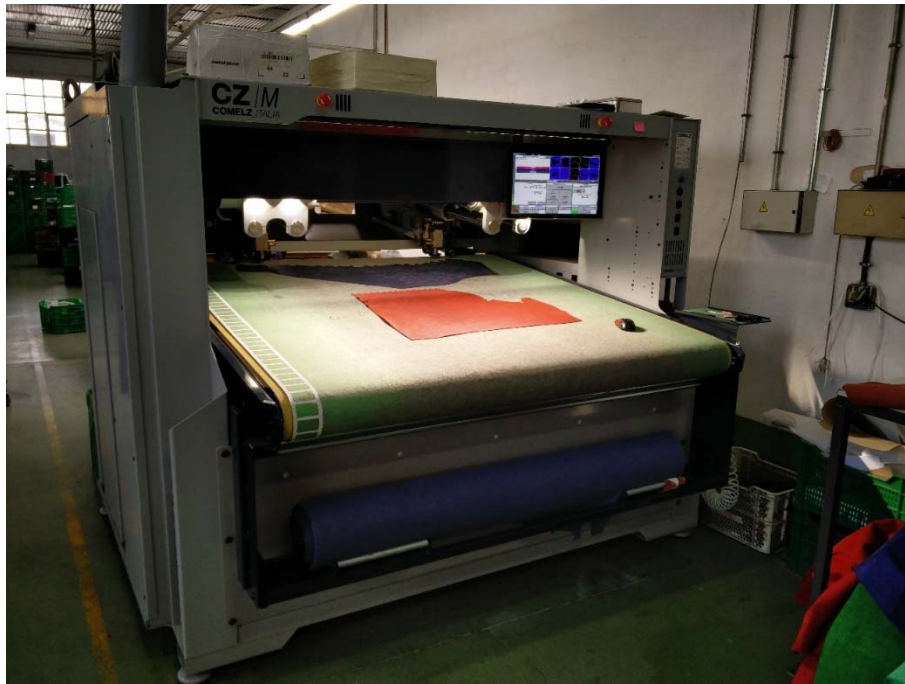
Cutting machine (MODEL Comelz CZ/M).
